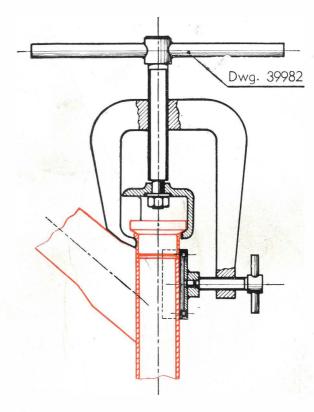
Detailed drawing showing how to extract the bearing upper cup using the tool 39982.
